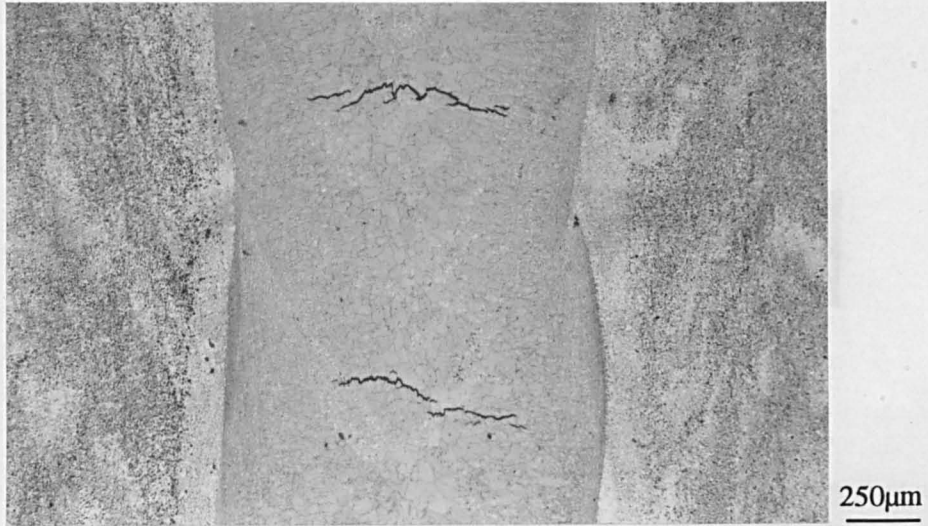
Optical micrograph illustrating the nature of 8090 CO₂ weld cracking. On a near surface plane cracks run across the weld width.
